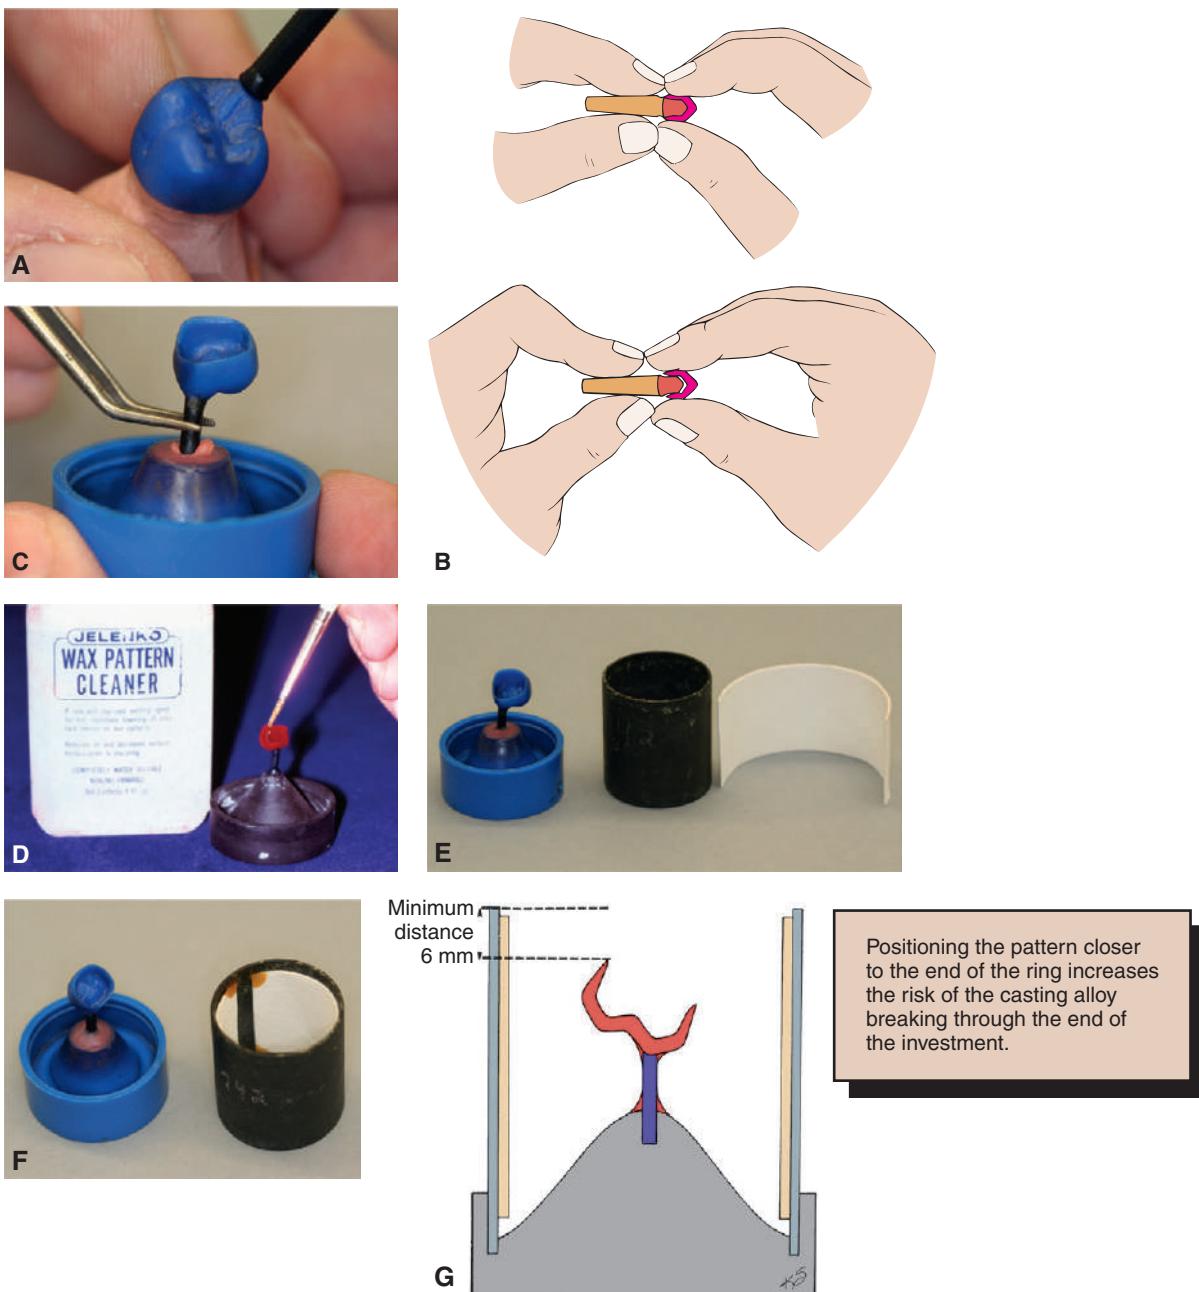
Sprue technique for a single casting. (A) Attaching the sprue to the pattern. (B) Removing the pattern from the die. (C) Positioning the pattern on the crucible former. (D) Application of surfactant. (E) A ring liner increases the setting expansion. (F) The ring liner has been stabilized with sticky wax. (G) The pattern must be positioned a sufficient distance from the end of the ring.
